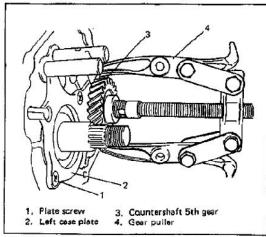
A-27 Removing 5th Gear and Left Case Plate
